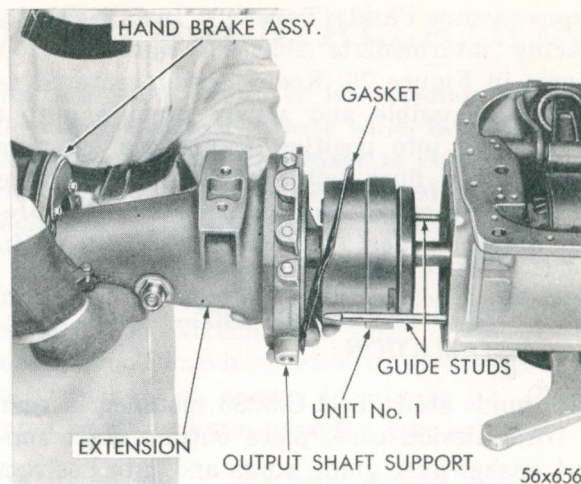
Removal of Output Shaft Support, Extension, Handbrake Assembly and Unit No. 1 as an Assembly
